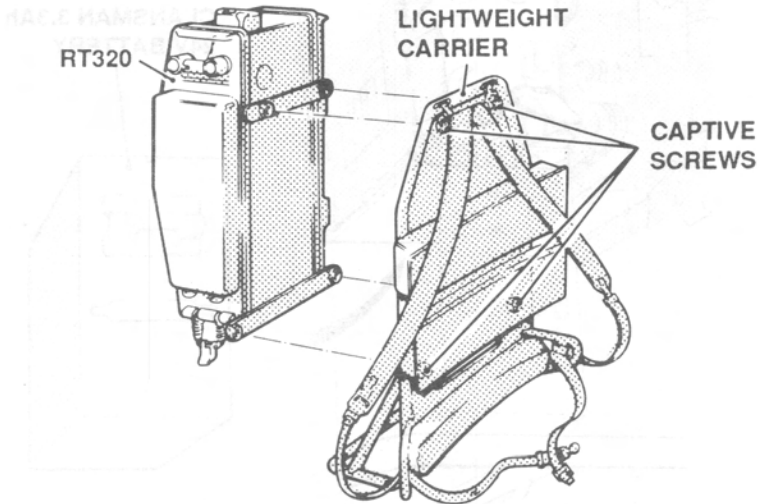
Fitting RT 320 to Carrier (Lightweight)
